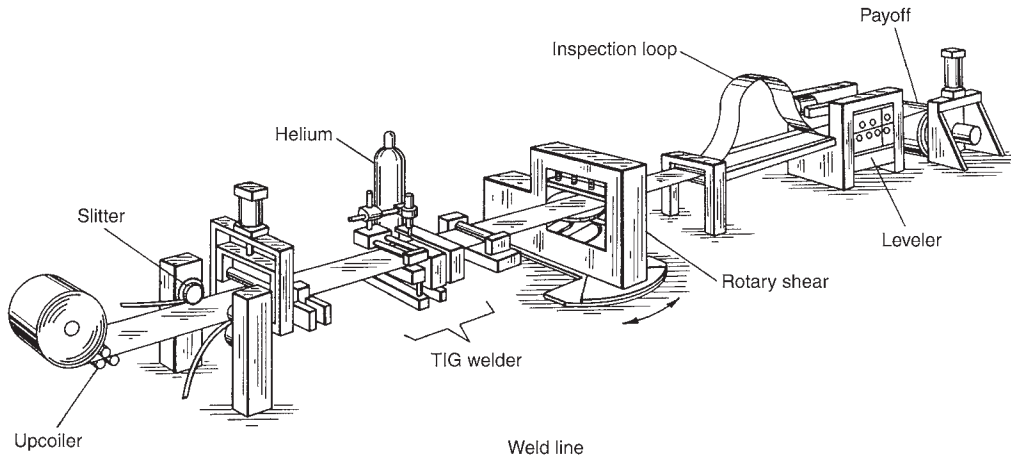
Typical weld line for the gas tungsten arc (tungsten inert gas, or TIG) process
